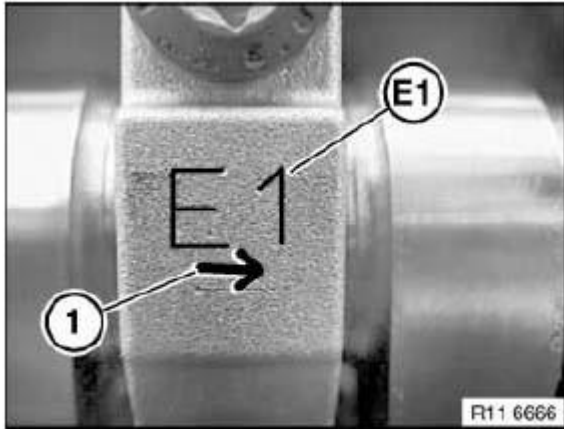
Positioning Inlet Camshaft Lobes
